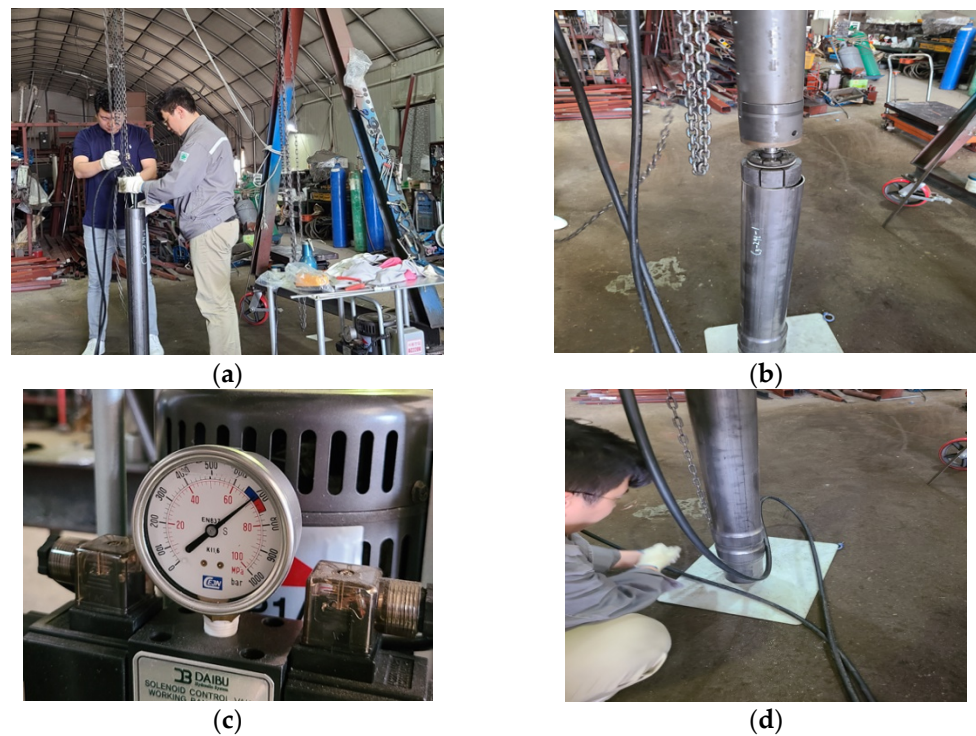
Laboratory experiment process for prototype of hydraulic expansion equipment: (a) Insertion of prototype of hydraulic expansion equipment into steel pipe; (b) Installation of prototype of hydraulic expansion equipment; (c) Application of expanding pressure; (d) Steel pipe after expansion process.
